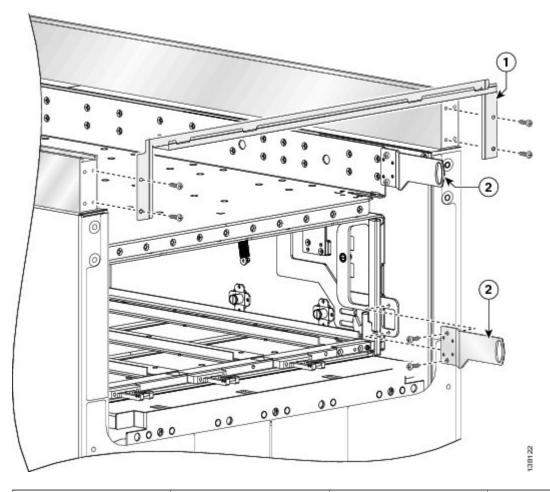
Removing the Front (SFC) Side Inlet Screen and Lower Grille Frame Assembly
